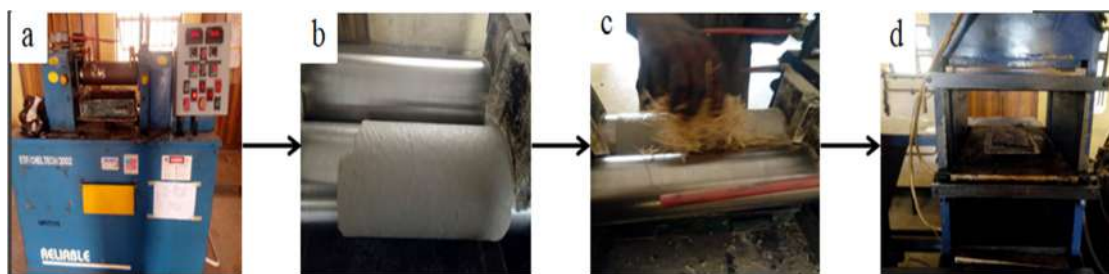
Composite production process; a) Two roll mill machine b) PP compounding c) Mixing PP with Sisal fiber d) Compression Moulding Machine
